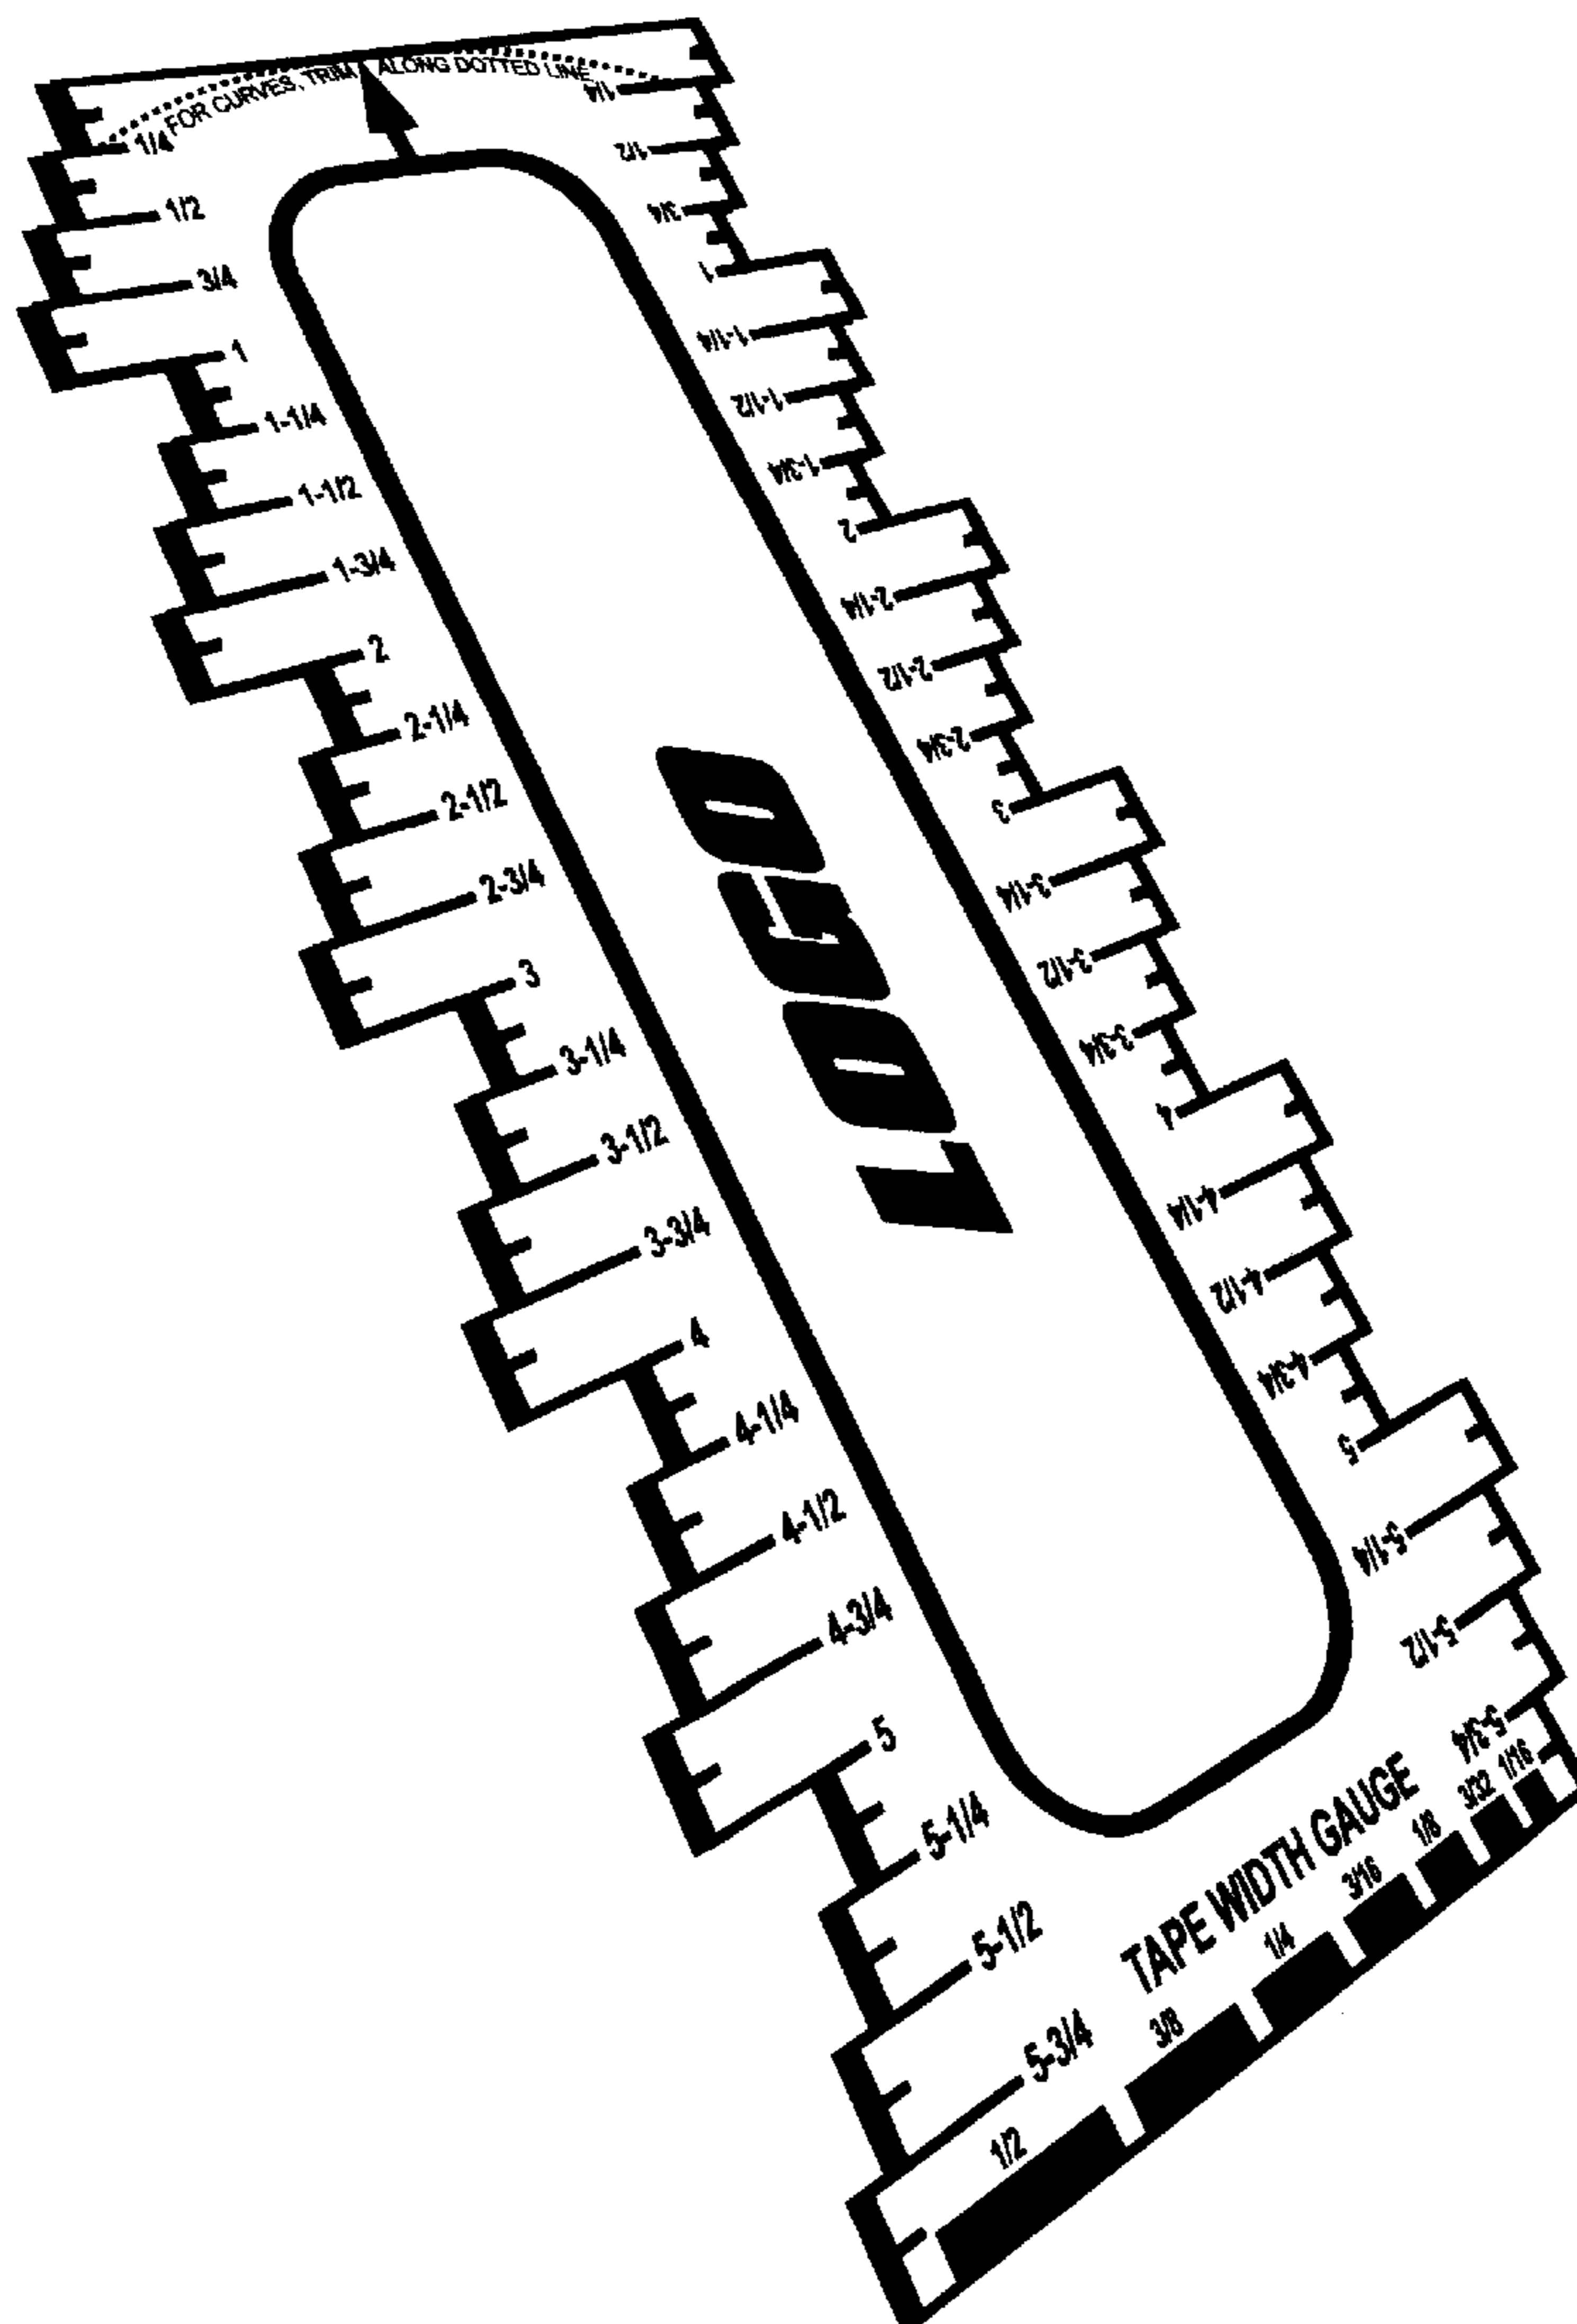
is a perspective view of a “graphics and pinstriping gauge” showing my new design;
